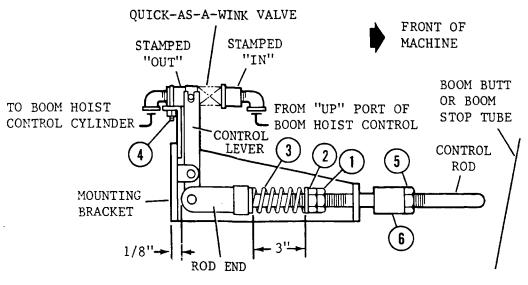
AUTO BOOM STOP ASSEMBLY
